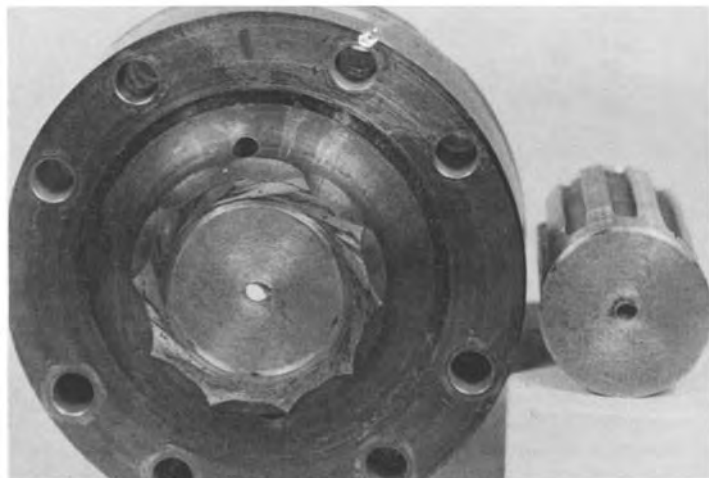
Single-overload torsional fracture of a shaft of ductile steel similar to that in Fig. 5. Hole in center is the lathe center from the original machining on the part
